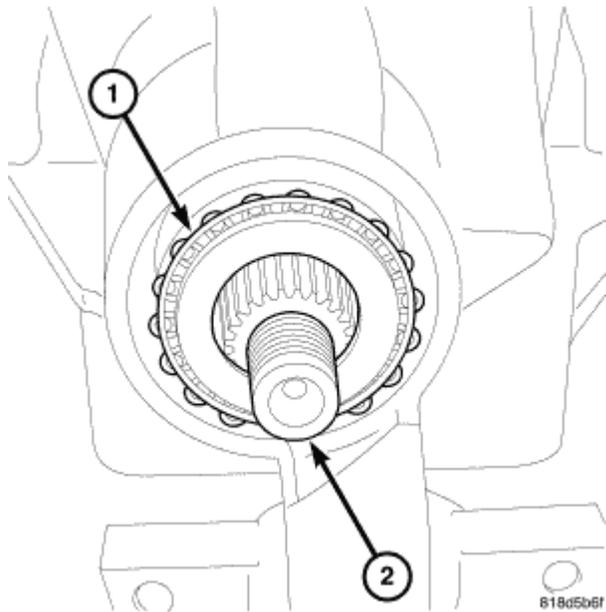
Installing Front Pinion Bearing On Pinion Shaft
